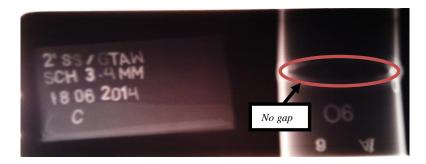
The X-Ray of TIG welding using Nitrogen Gas Impulse
